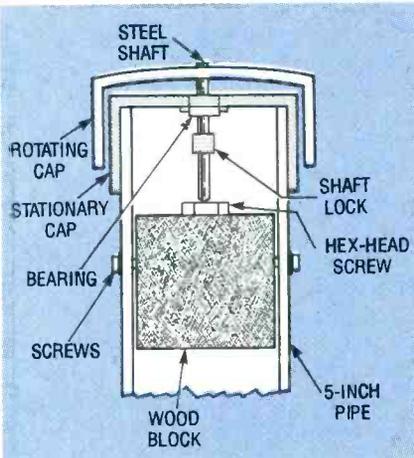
THE ANEMOMETER SECTIONS go together as shown here.
